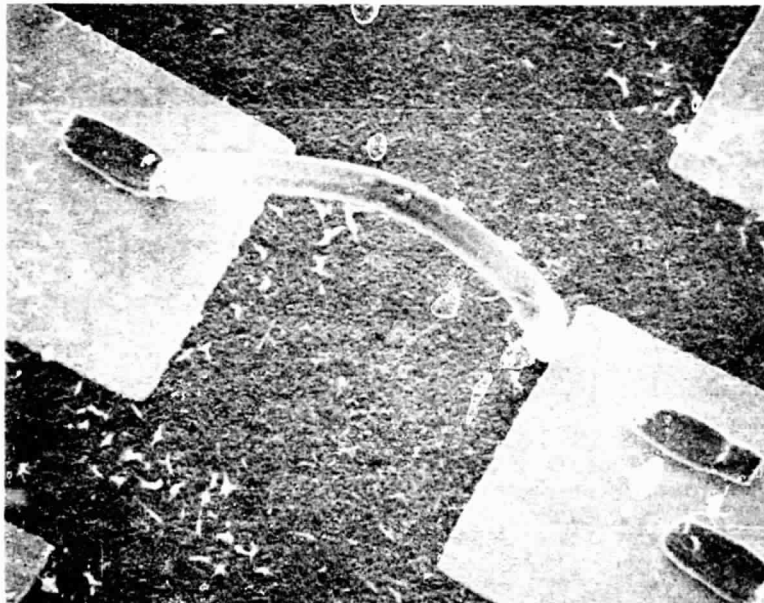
Ultrasonic aluminum wire bond fracture. Failure was due to ductile fracture. The plasma cleaned part had been coated with E5 epoxy. 196X
